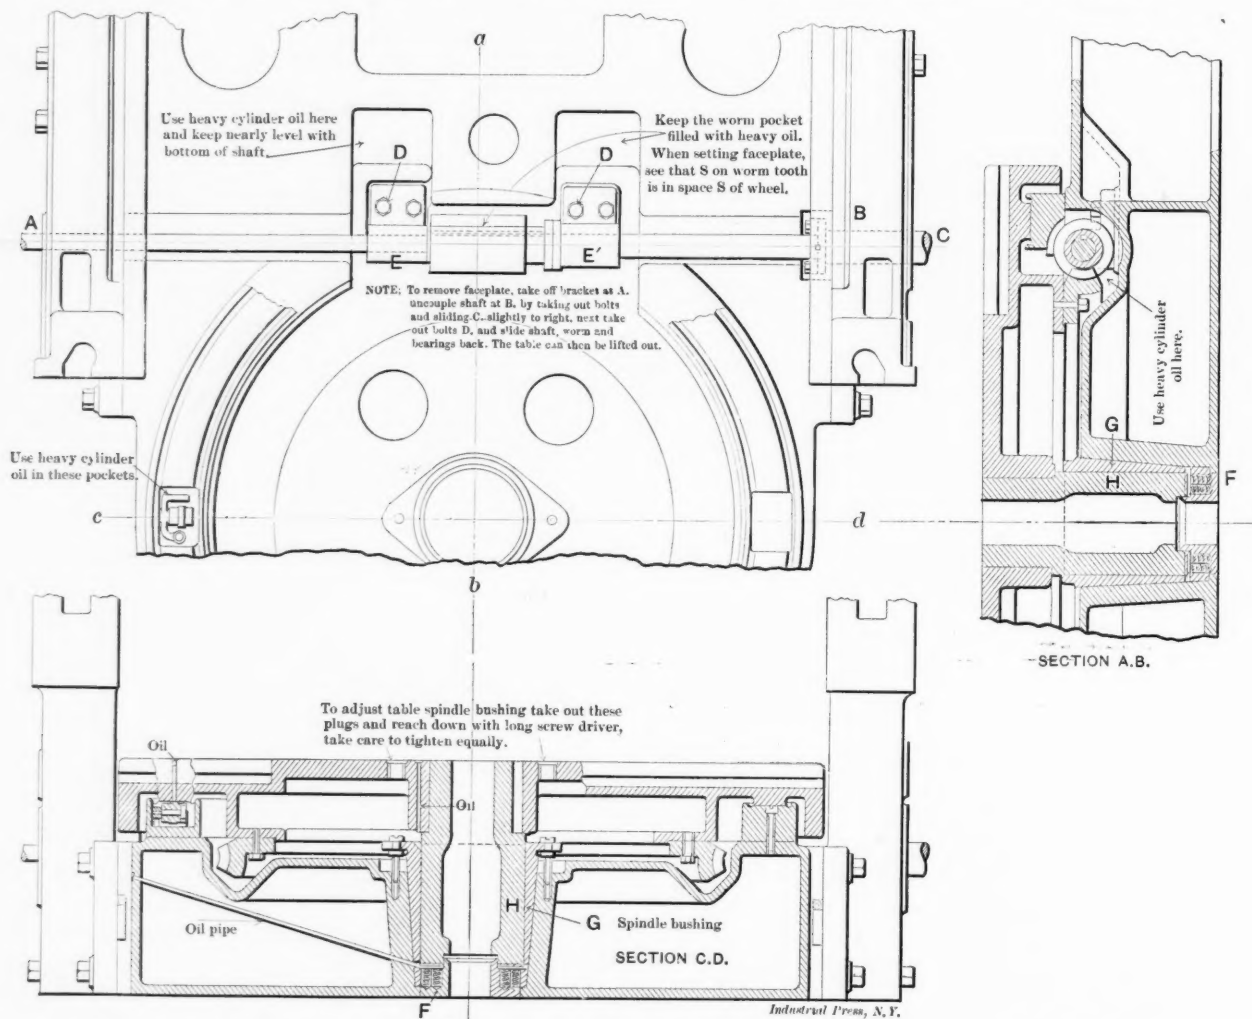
Instruction Sheet sent out with Worm-driven Boring Mill, showing Construction and giving Directions as to Care, etc.
